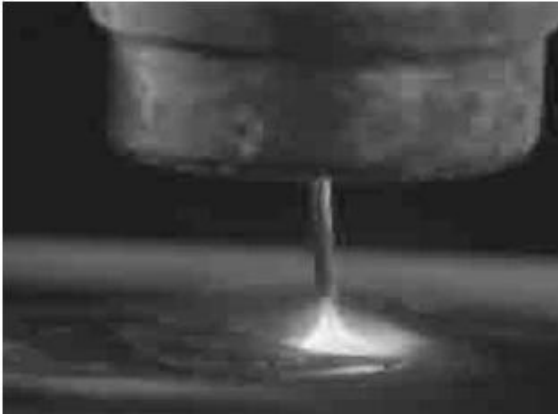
MIG Welding (Source: M/s Lincoln Electric)
